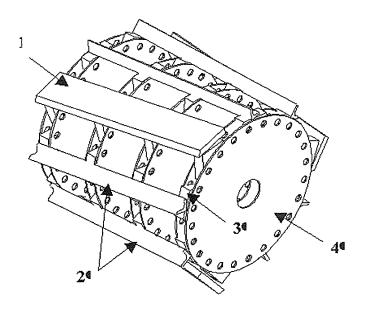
Schematic of modified cutterhead 1 – Original knives, 2-Scutcher bars, 3-Support blocks, 4- Cutterhead flanges
